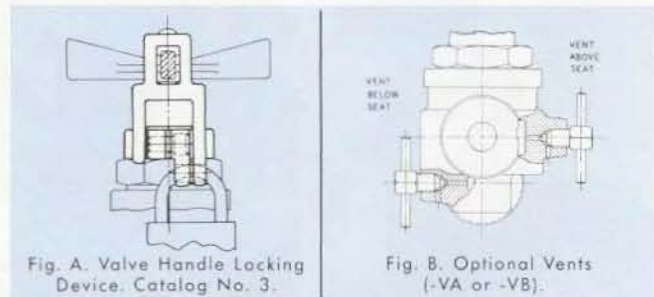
Fig. A. Valve Handle Locking Device. Catalog No. 3.
